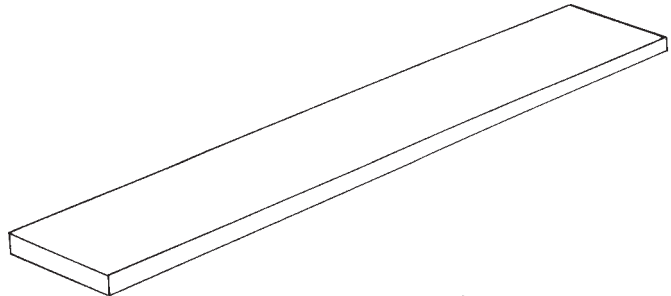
A Flat Beam Spring For Use As a Standard of Damping in a Bending Machine
